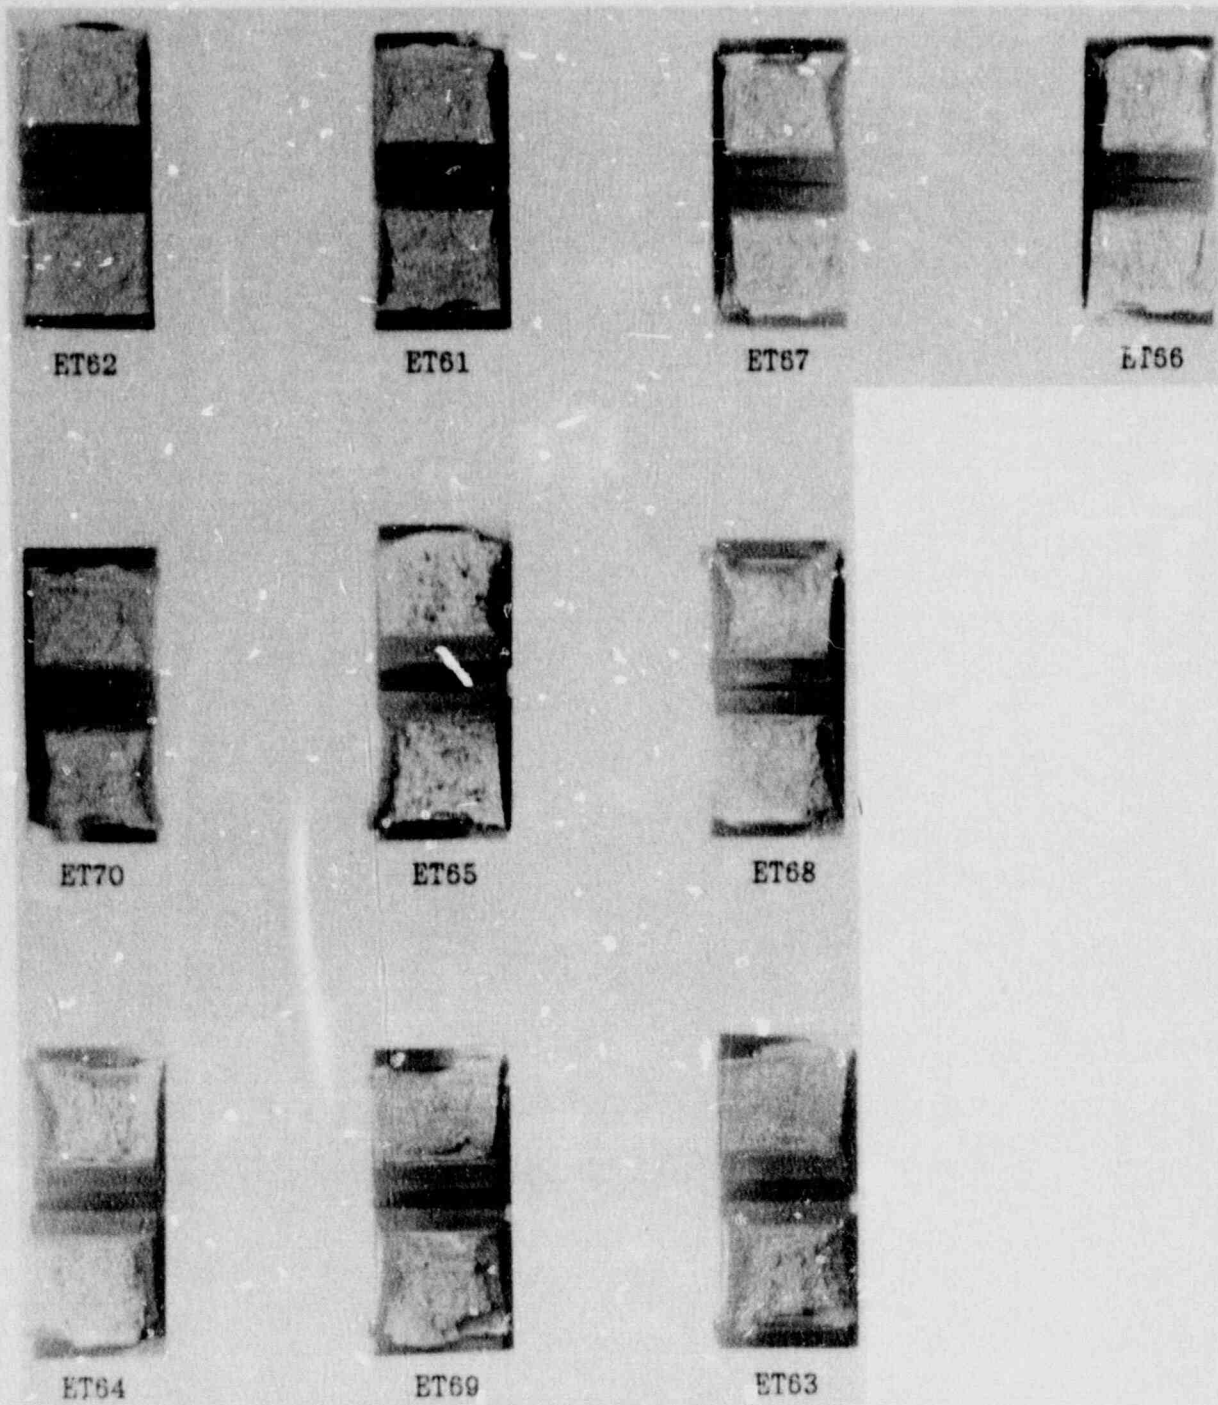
CHARPY IMPACT SPECIMEN FRACTURE SURFACES FOR ZION UNIT 2 REACTOR VESSEL SHELL PLATE C4007-1 (TRANSVERSE ORIENTATION)
